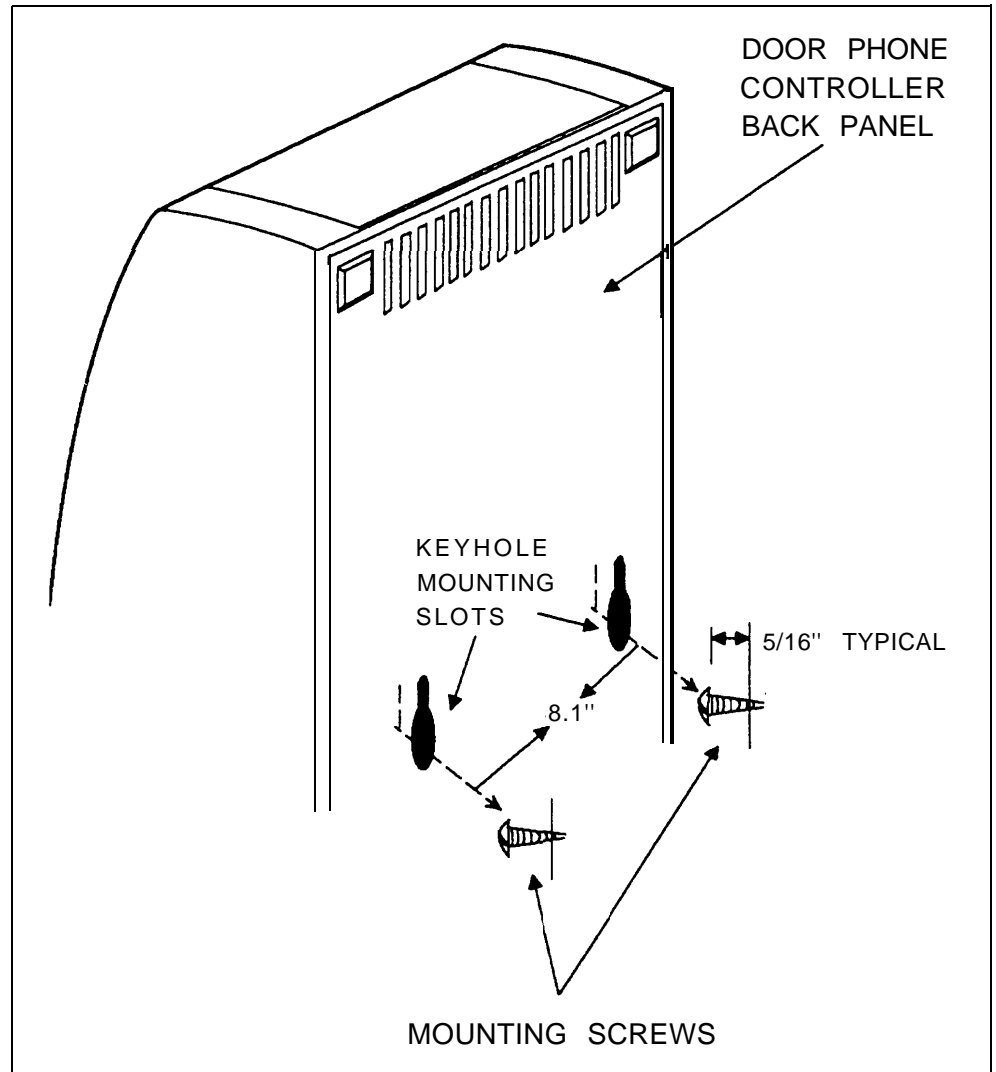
Mounting AT&T Door Phone Controller to Wall
